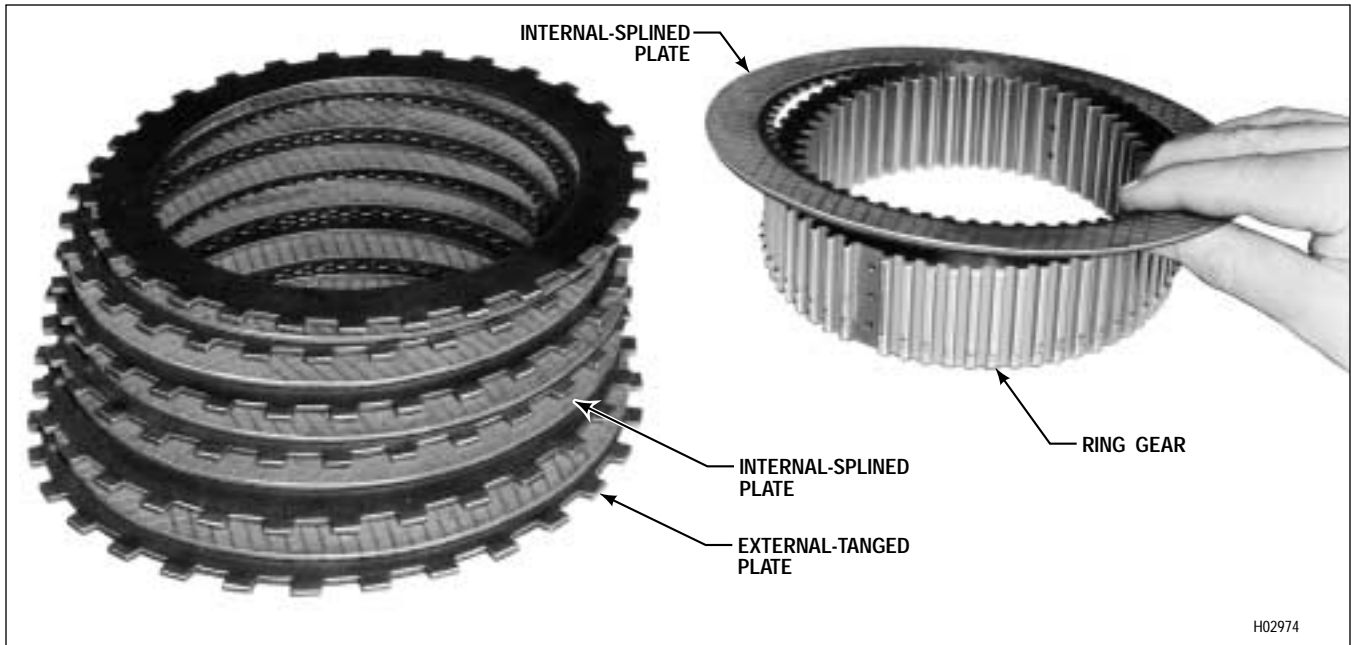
Installing First Clutch Plates Onto Rear Planetary Ring Gear
